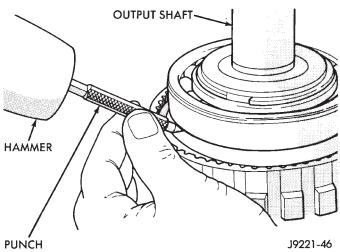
Marking Annulus Gear And Output Shaft For Assembly Alignment
